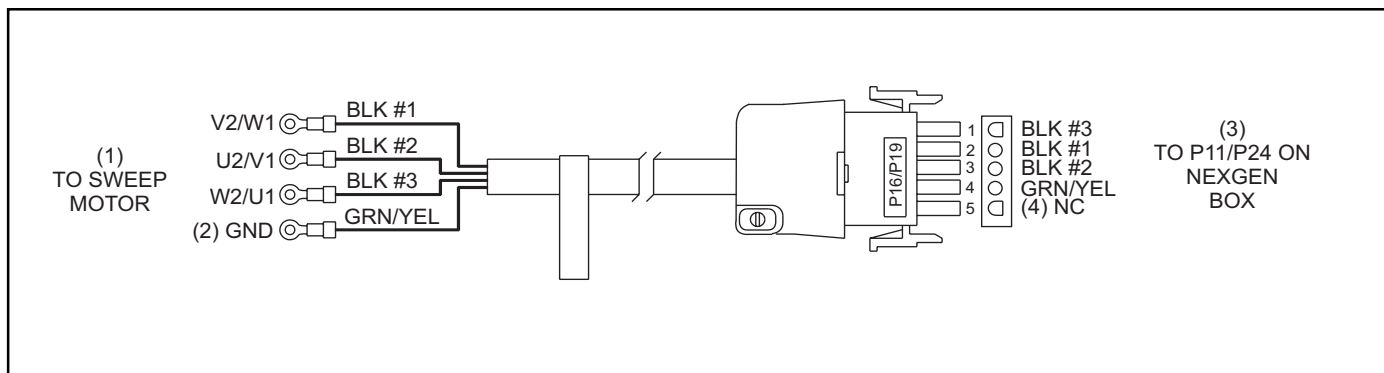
Sweep Motor Cable Assembly (Part No. 47-142617-000)
